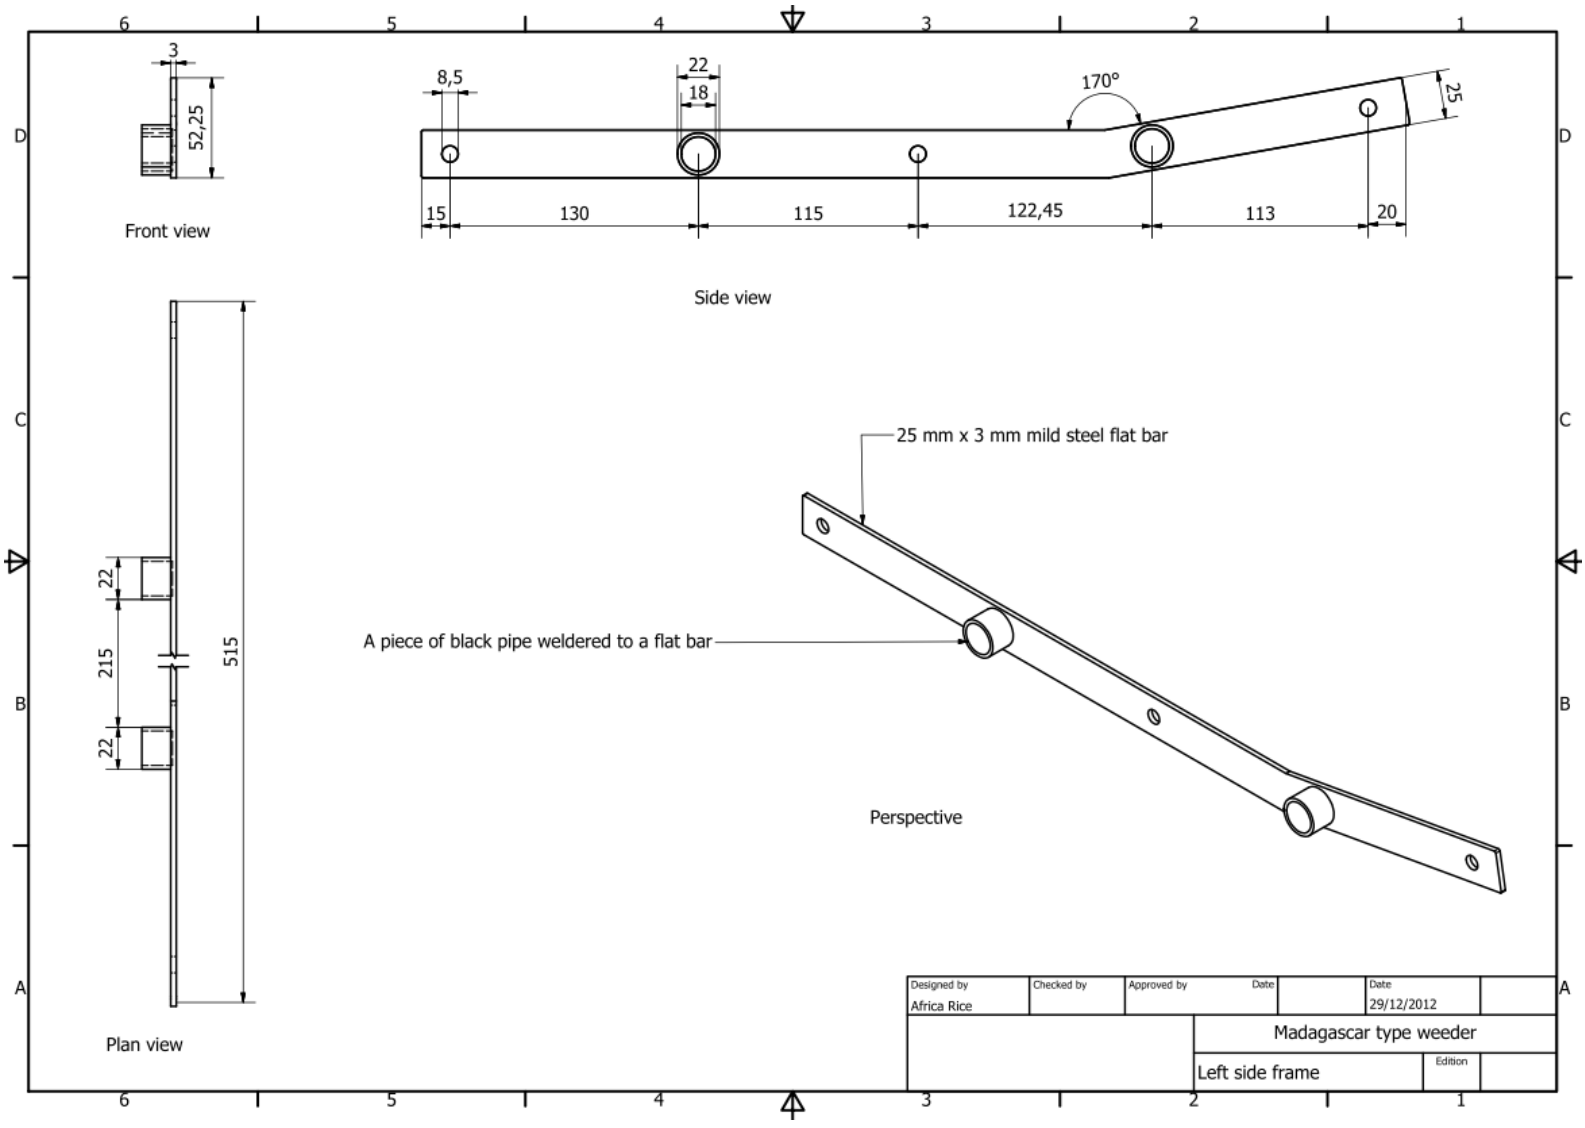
B: Technical drawing of the left side frame of the Twisted-Spike Floating Weeder
